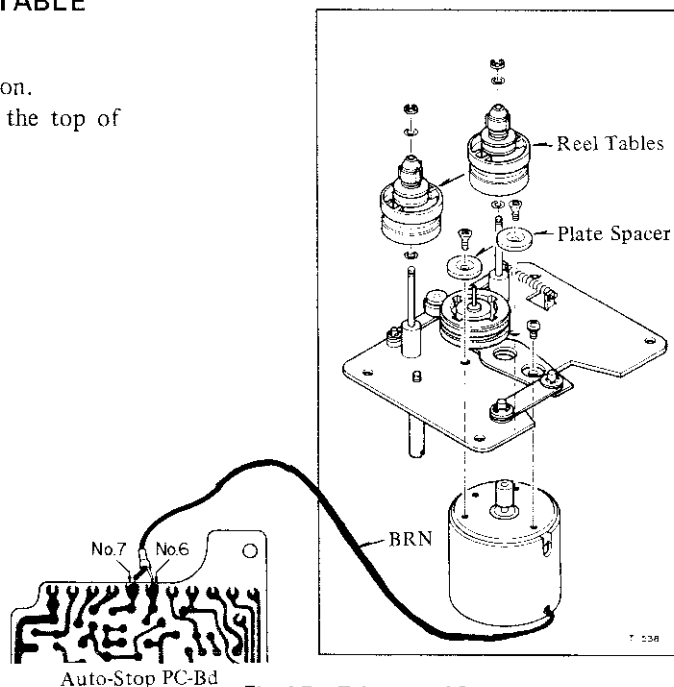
Take-up and Supply Reel Tables Ass'y Removal
